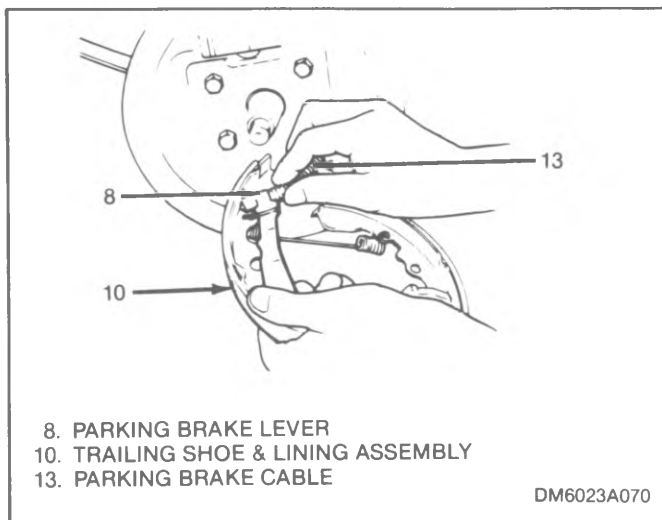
Disconnecting/Connecting Parking Brake Cable
